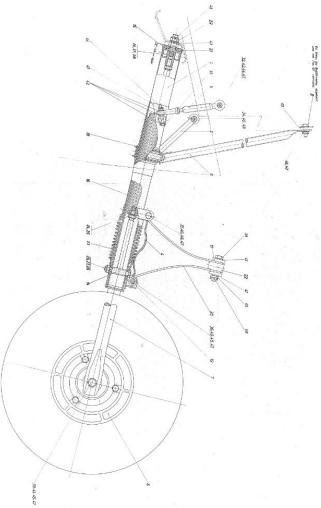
Landing gear leg with internal gas spring. Illustration: Airbus Defence and Space GmbH.
